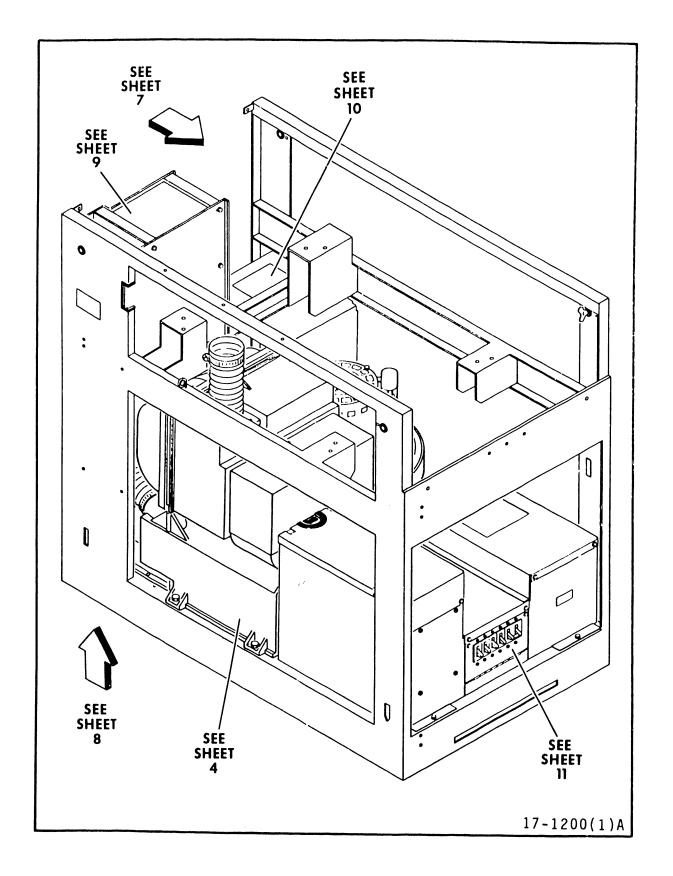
A-12. Frame & Air Assembly (Sheet 1 of 11)
